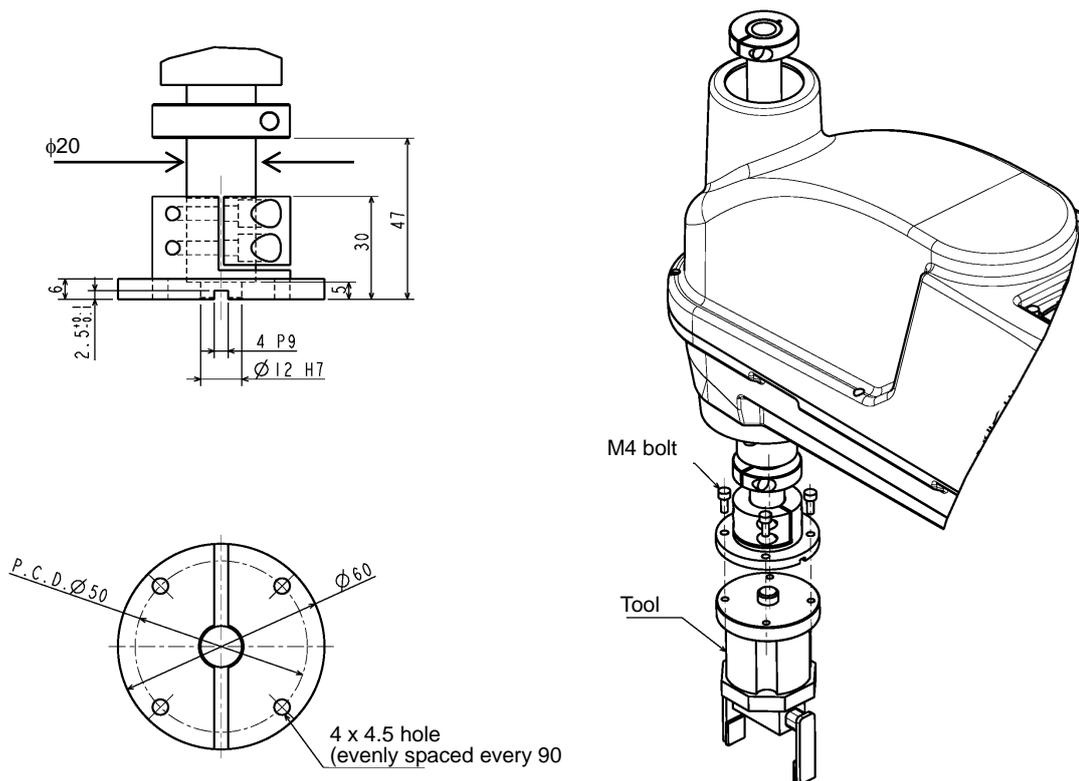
Tool mounting dimensions (KHL-500, KHL-600 and KHL-700)
